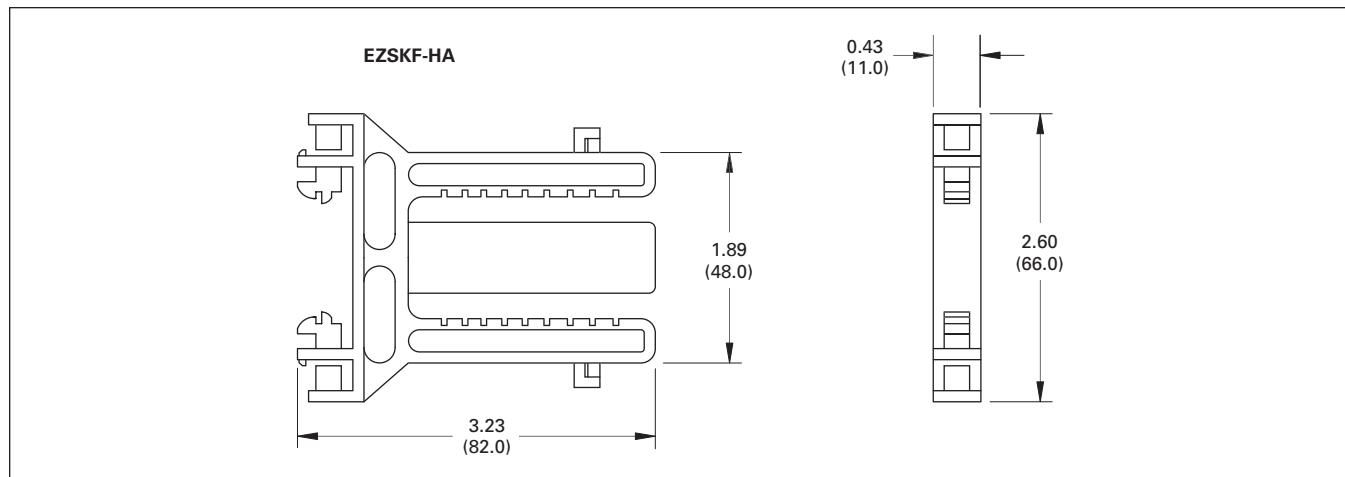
EZSKF-HA Series Dimensions in Inches (mm), Drawing Number MD05013015E
